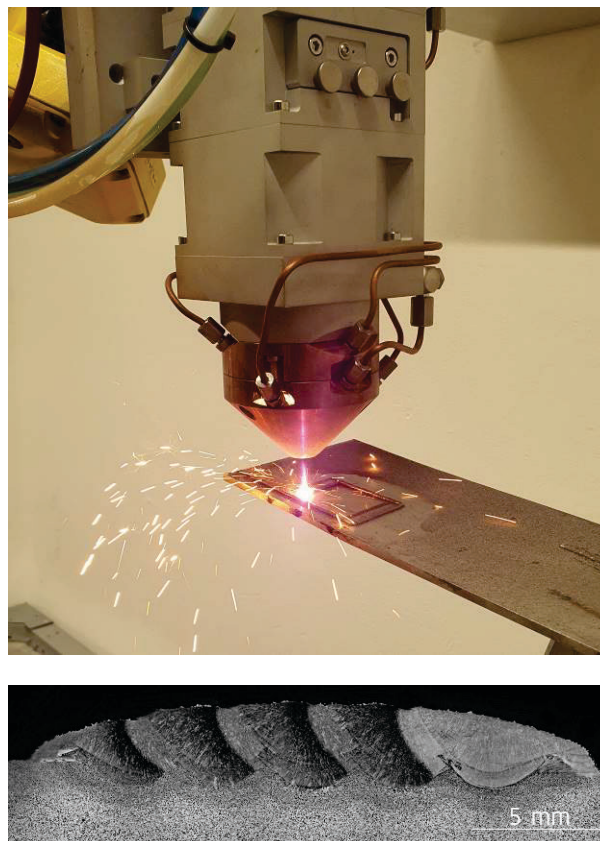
Laser cladding process (above) and cross section of the cladded layer (below)
